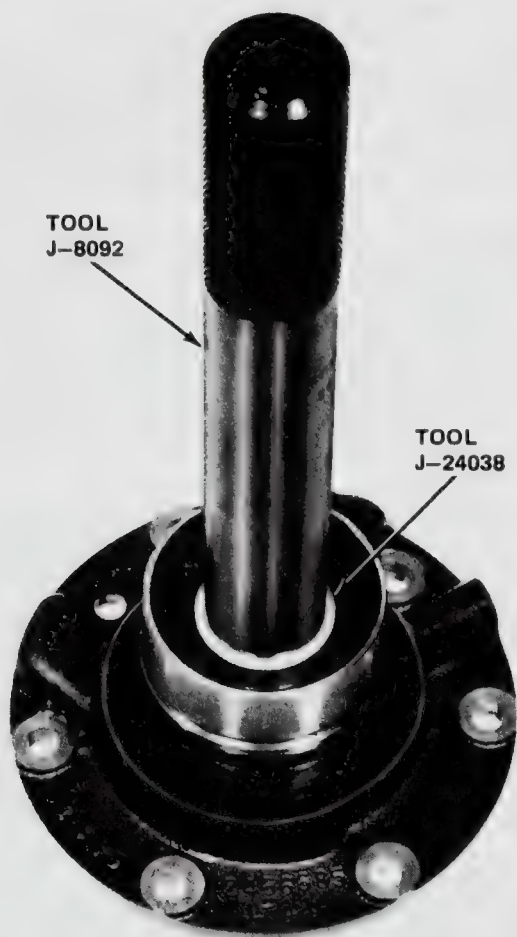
C-72 Reaction Shaft Bushing Removal—Model 727
